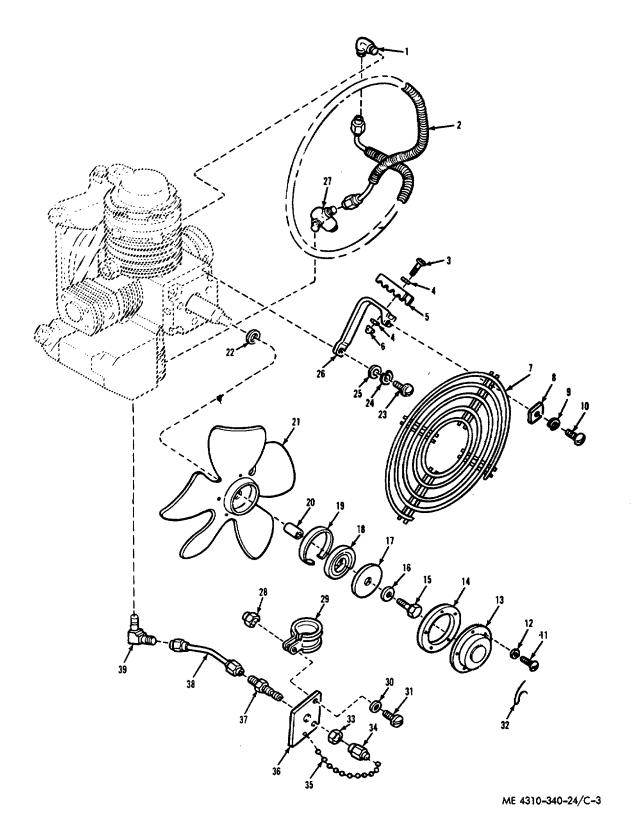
Fan, fan guard, drain tube, third stage cooler, fan guard bracket, and related parts-exploded view.
